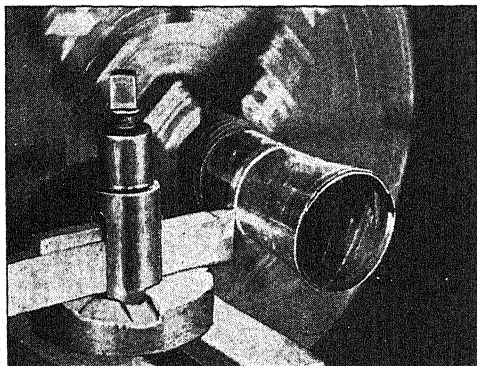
Cutting a Glass Tube with a Carbide Lathe Tool
